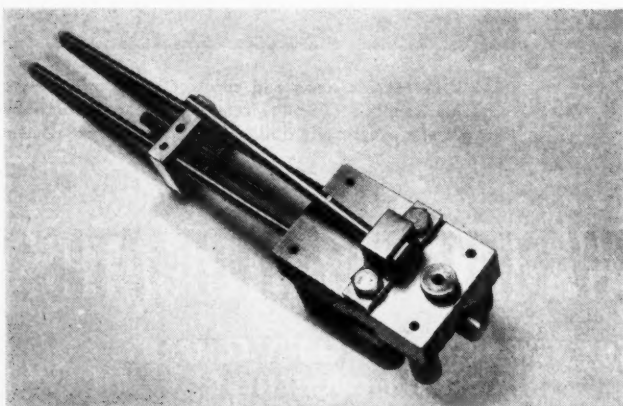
Becker Improved Jig for Drilling Cross-pin Holes
